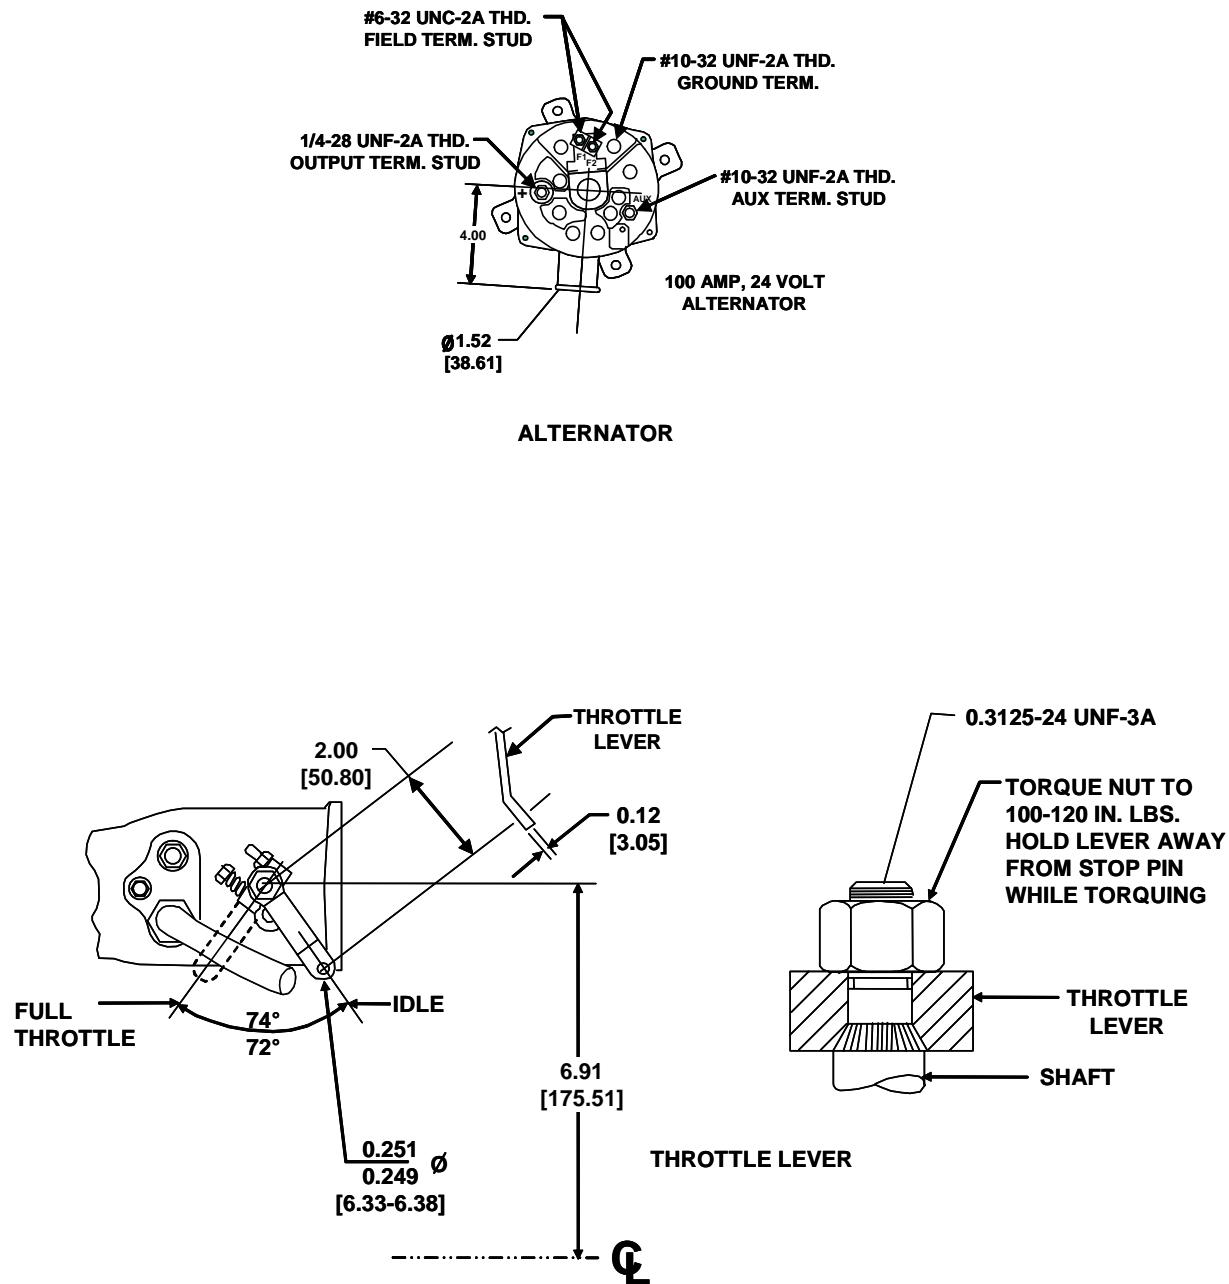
TSIO-550-G Alternator and Throttle Detail
